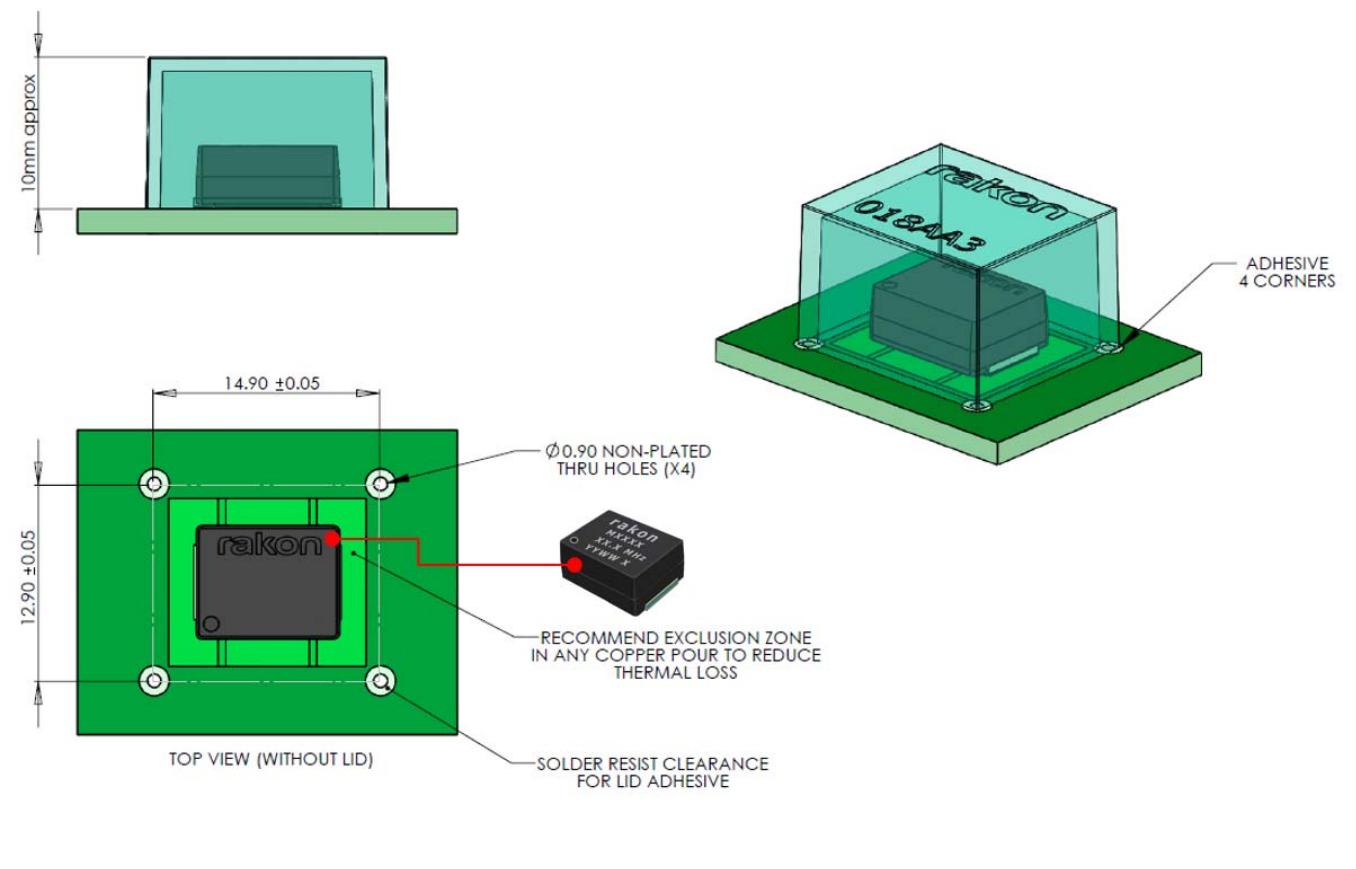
RFPO50 / RFPO55 / ROM1490xx Cover Outline Drawing
